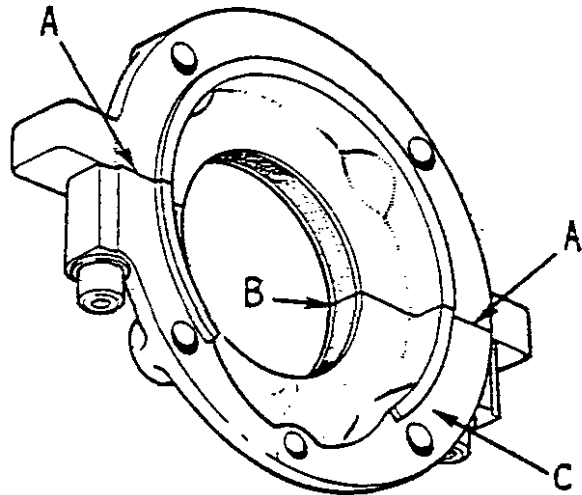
CRANKSHAFT REAR OIL SEAL
